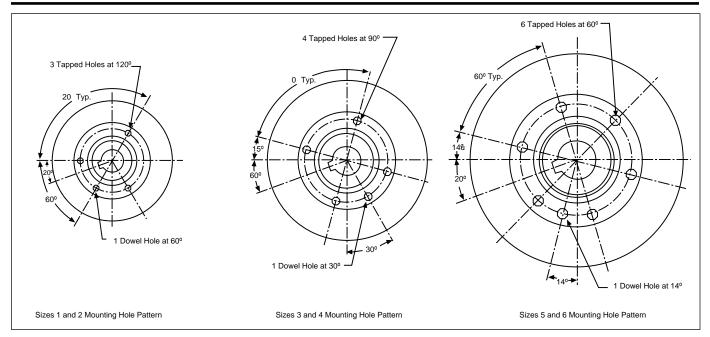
TYPE T STANDARD MOUNTING HOLE PATTERNS
